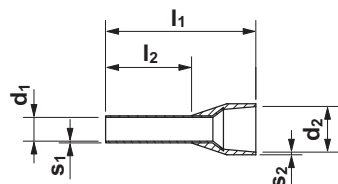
Dimensions (tolerances according to DIN 46228-4)
